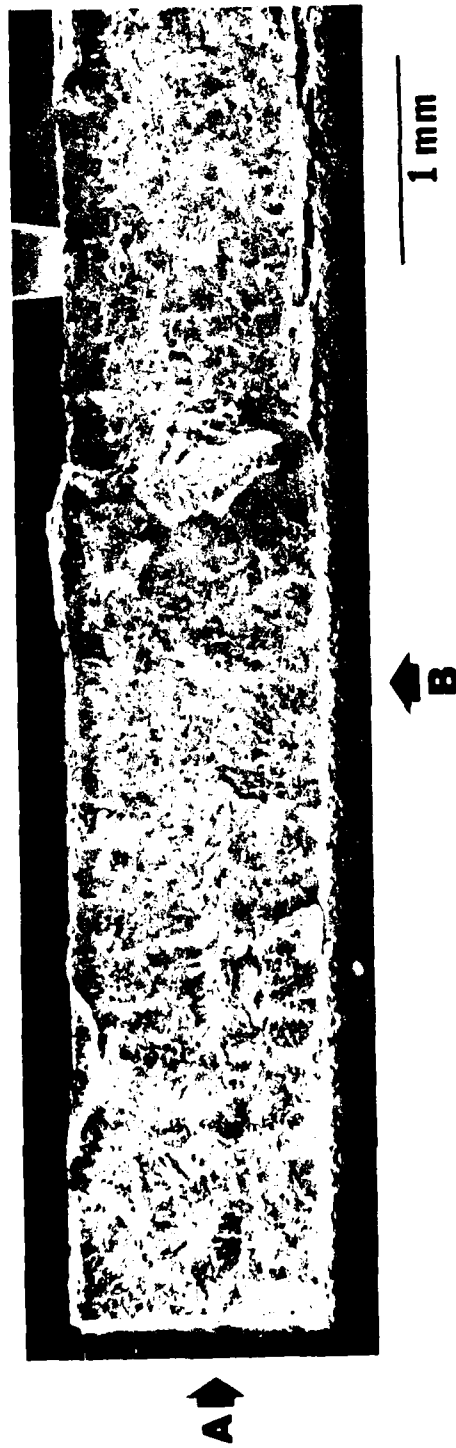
Fracture surface of specimen to test at 215 K. Notch is shown by arrow (A) and bottom edge of specimen (B). Crack propagated from left to right.
